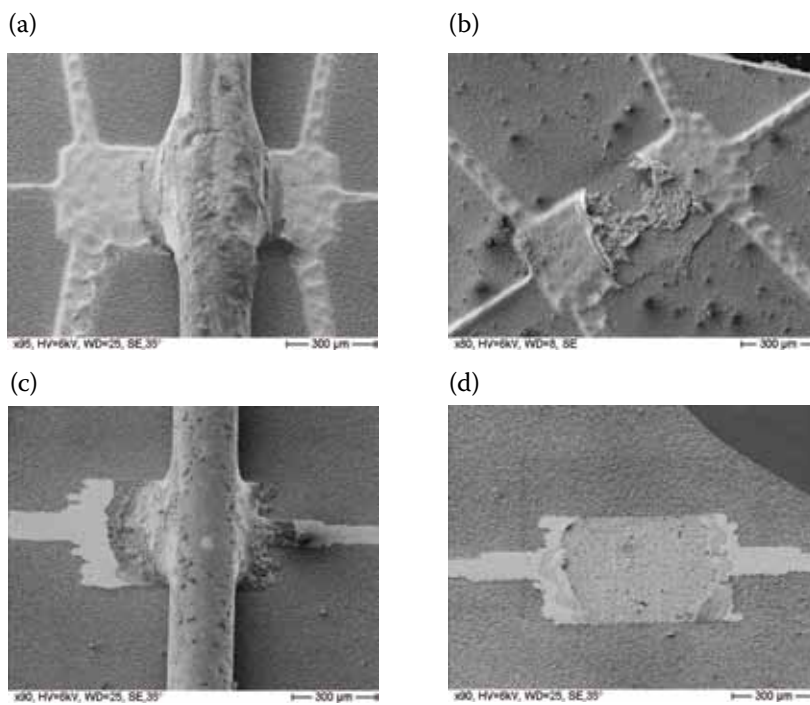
SEM images of soldered Cu wires in cell metallization pads, and their main fracture mode after the pull test: (a-b) screen printing; (c-d) Ag plating.
